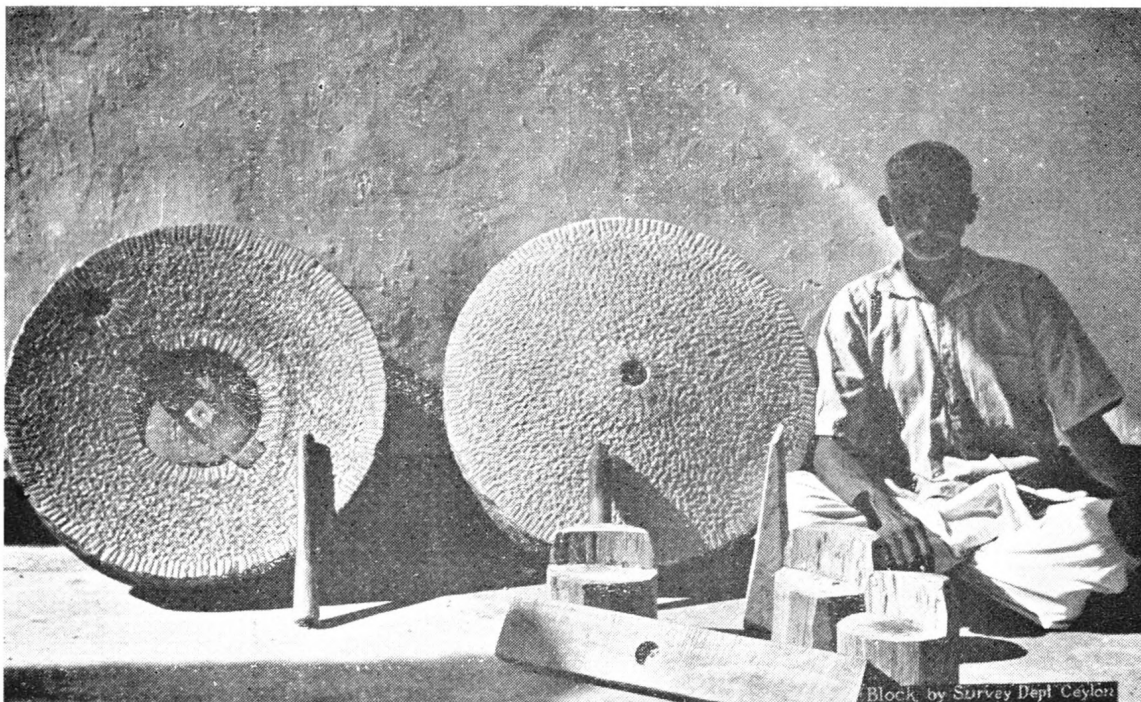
WOODEN PARTS AND SIDE VIEW OF THE COMMERCIAL MODEL OF DHAL-SPLITTING MILL.
